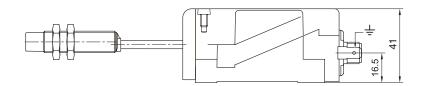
Processor BIS L-409-045-002-07-S4, dimensions in mm
